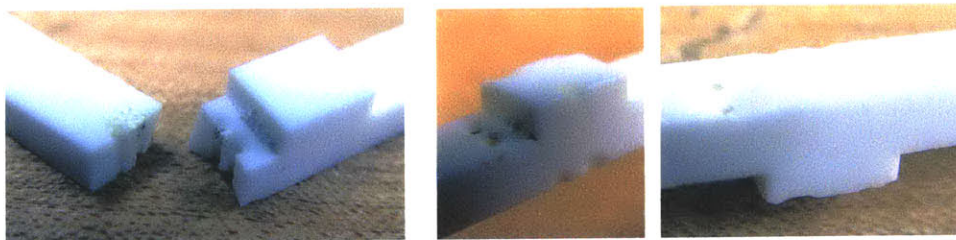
Attempts at machining pins from Macor (Corning, Inc.). The Macor is very brittle, and easily chips and fractures.
